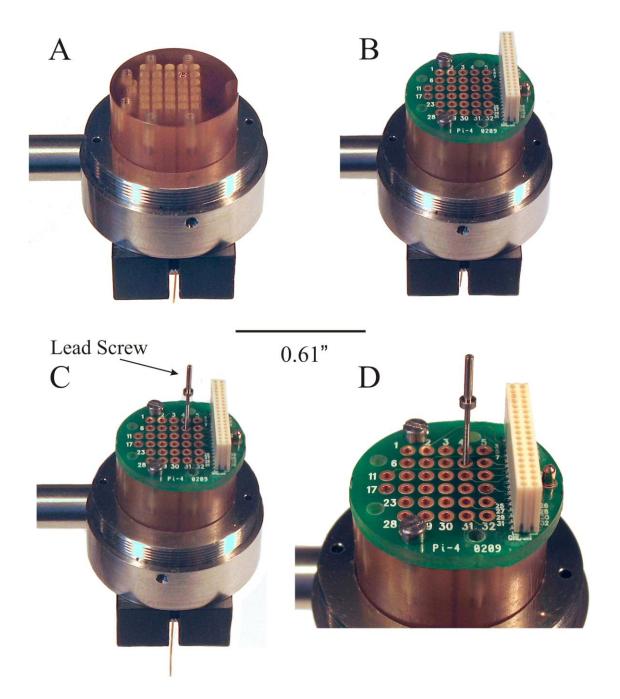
Loading the retaining cap, printed circuit board and lead screws. A. Retaining cap mounted over the plungerblock. B. PCB mounted onto the plungerblock and fixed in position with two 0.16" x 1.2 unm machine screws (*Note the position of these screws*.). C. A single lead screw loaded through the PCB. D. Close-up view of the image in C.
